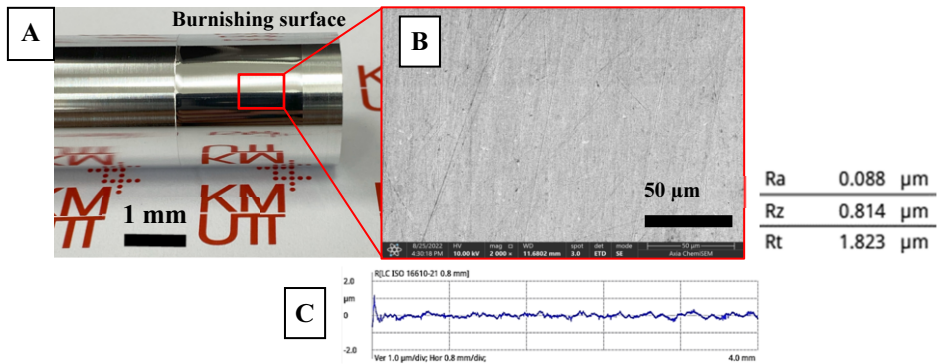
The finished surface of Al6063 by Final turning and burnishing tool (A), the magnified SEM image (B), and the surface roughness of the burnishing process(c)
